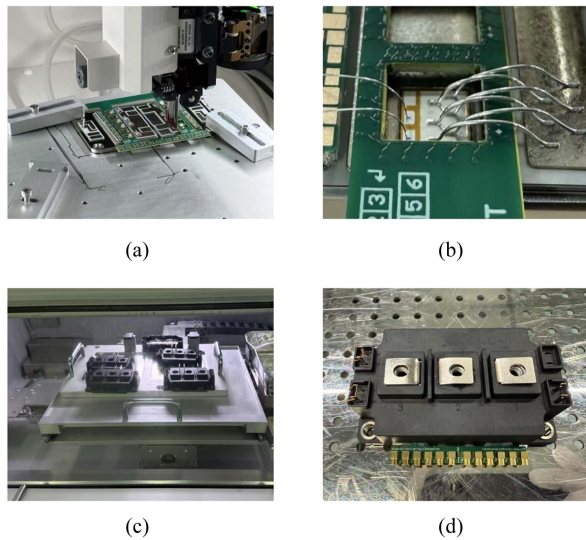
Photos of the key packaging processes. (a) Wire bonding. (b) Details of the bonding wires for a chip. (c) Silicone rubber potting. (d) Appearance of the finished module.
